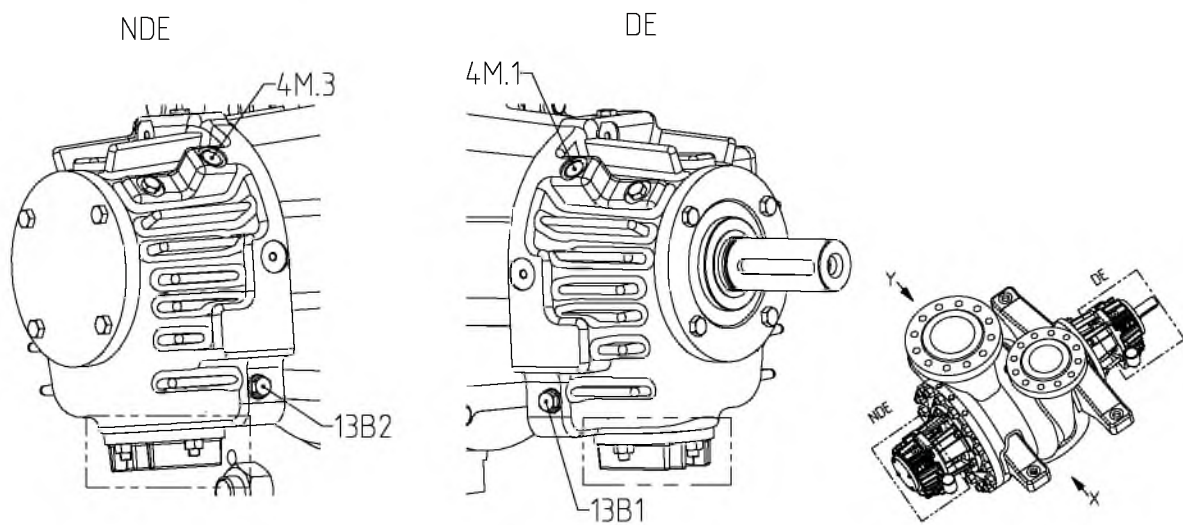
Bearing bracket connections - version with oil mist lubrication, view X
